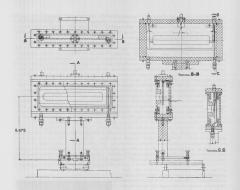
Assembly Drawing of Complete Counter.
